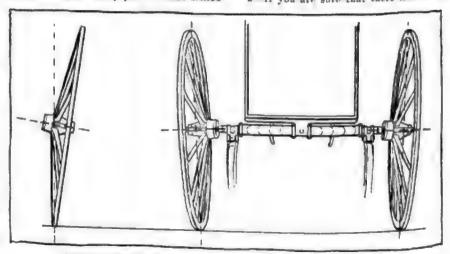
CARRIAGE WHEELS WITH DISH, CAMBER AND GATHER
